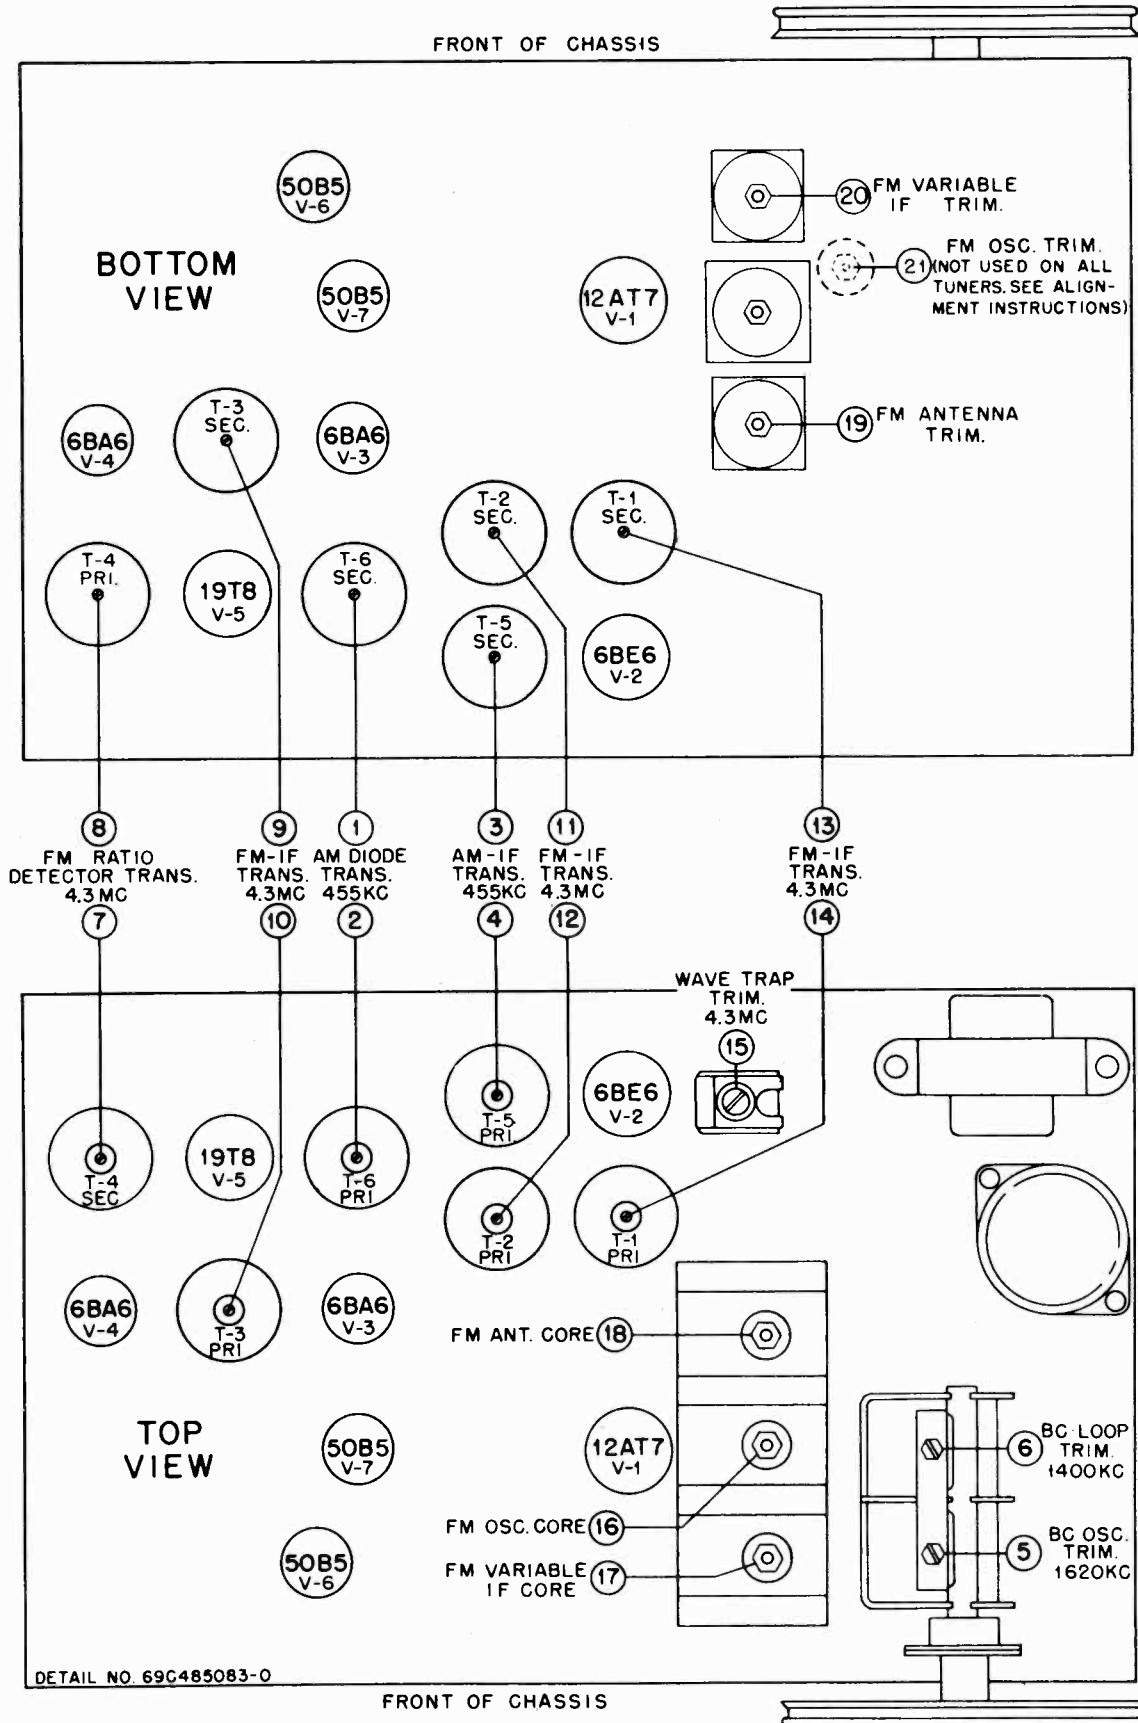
CHASSIS HS-133 TUBE & TRIMMER LOCATIONS
